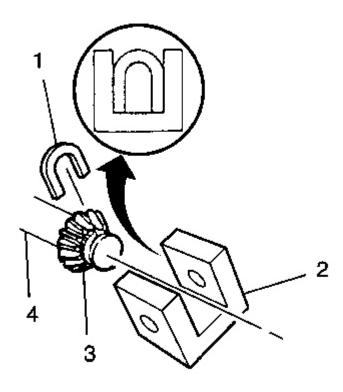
View Of Axle Shaft, Lock & Thrust Block Courtesy of GENERAL MOTORS CORP.
